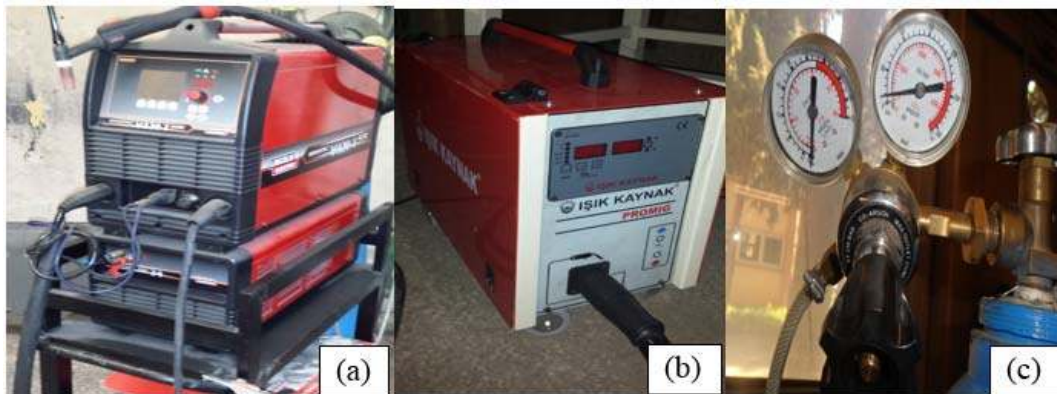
8. (a) Lincoln TIG welding machine; (b) Wire feeder machine; and (c) Argon regulator Gauges.
